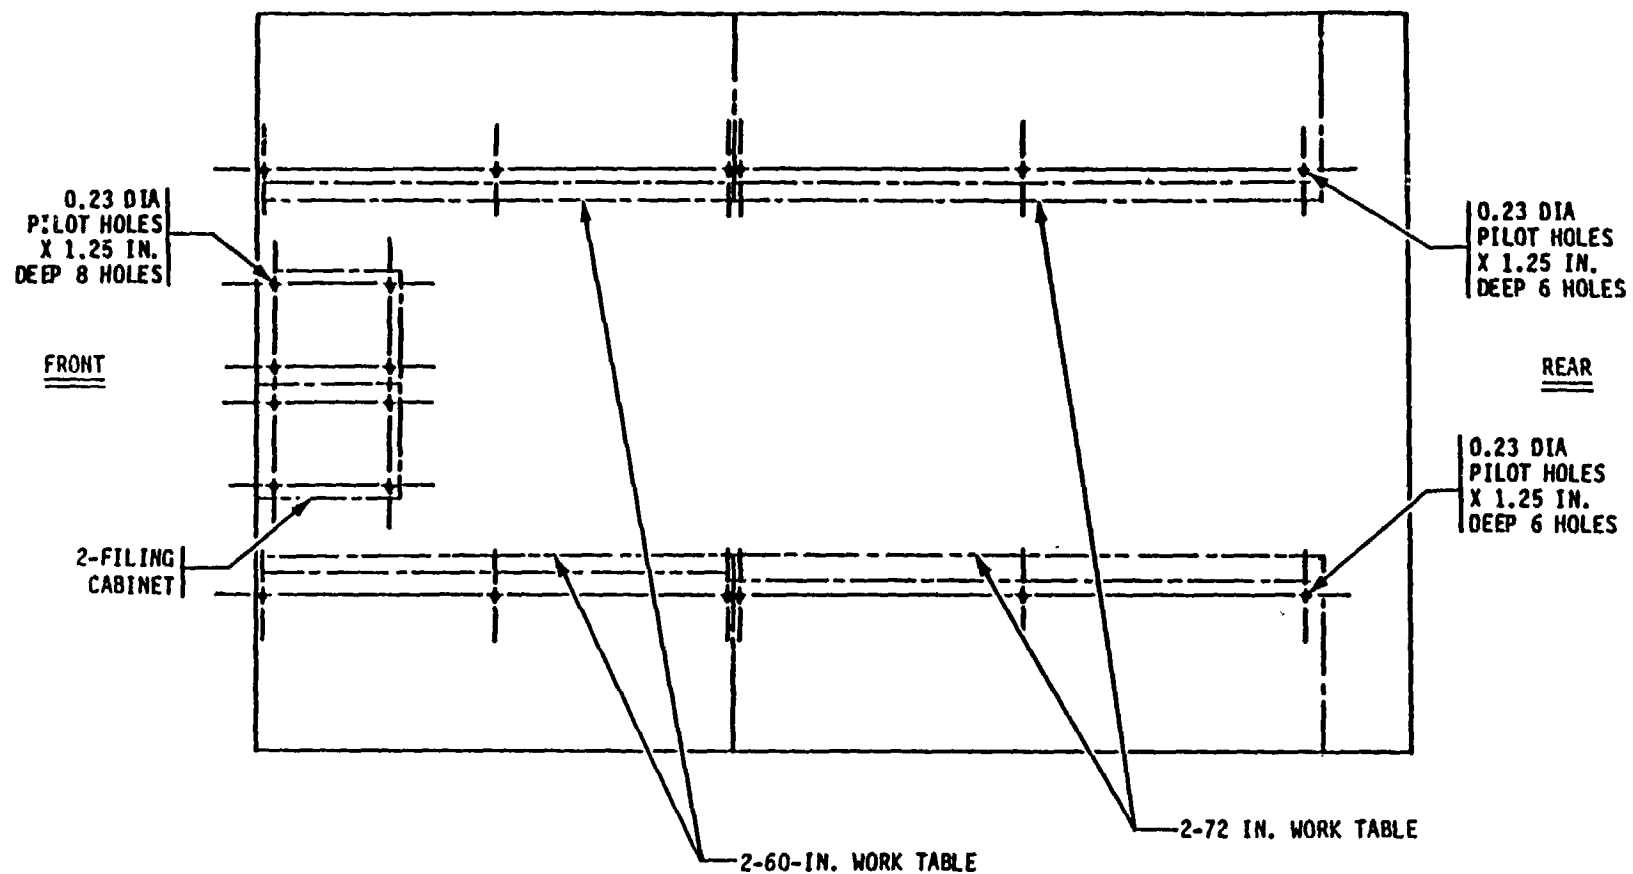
Hole Dimensions for Floor-Mounted Equipment, M109A3.
